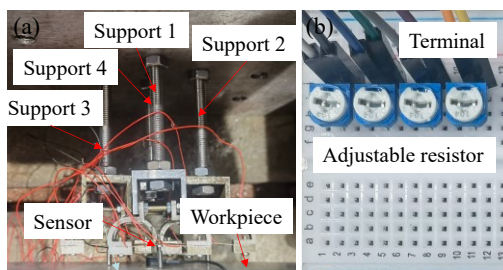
Workpiece fixture systems with different piezoelectric support and adjustable resistance circuits
